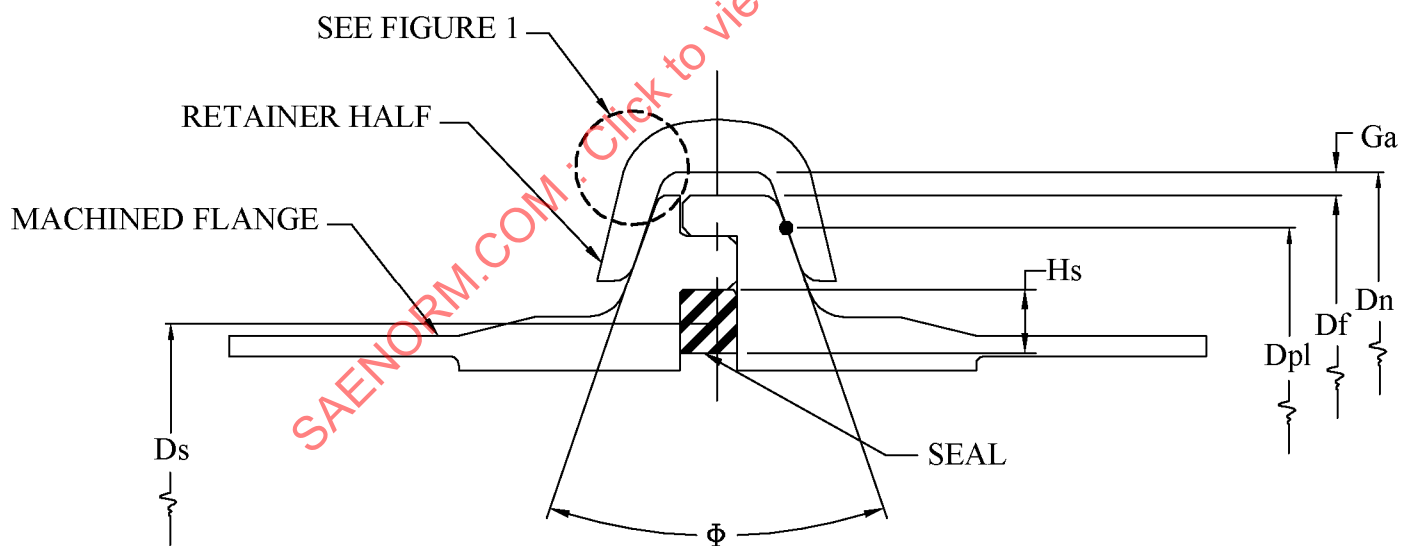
V-RETAINER COUPLING JOINT AND MACHINED FLANGES
